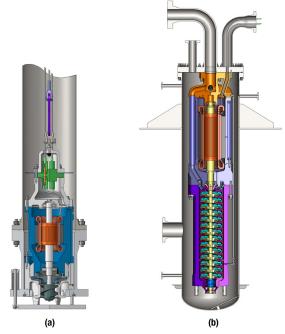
(a) Retractable pump, (b) multi-stage vessel mounted pump.
